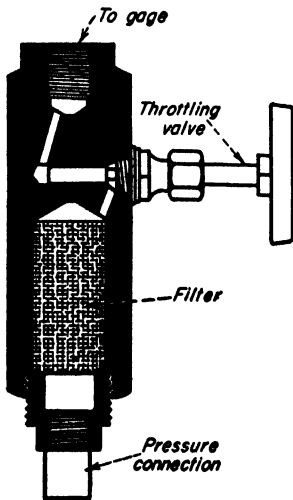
Snubbers throttle pulsating pressures and minimize damage to gages.
